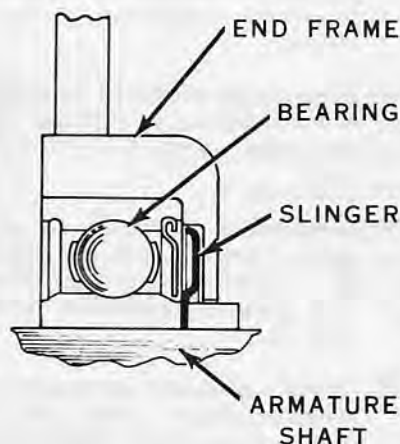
Drive end bearing assembly; 10-SI and 27-SI Series (Some models use flat washer instead of slinger)
